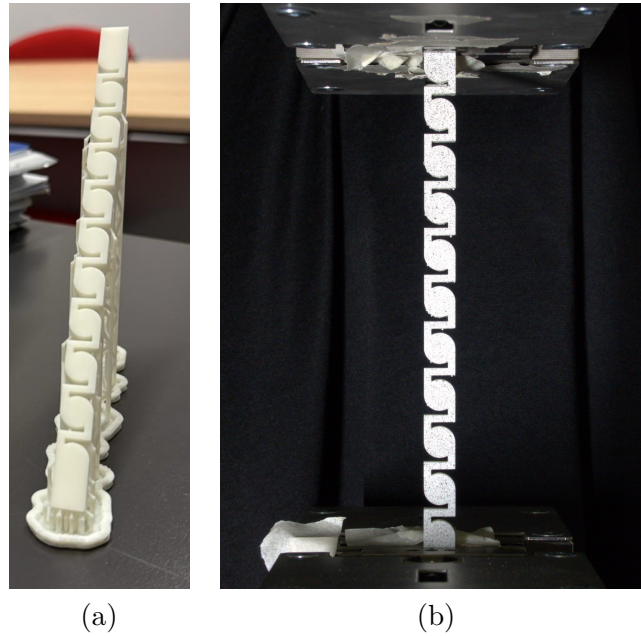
(a) 3D printed specimen with SLA technology. (b) 3D printed specimen positioned in the testing machine and when clamped in the testing machine grips.
